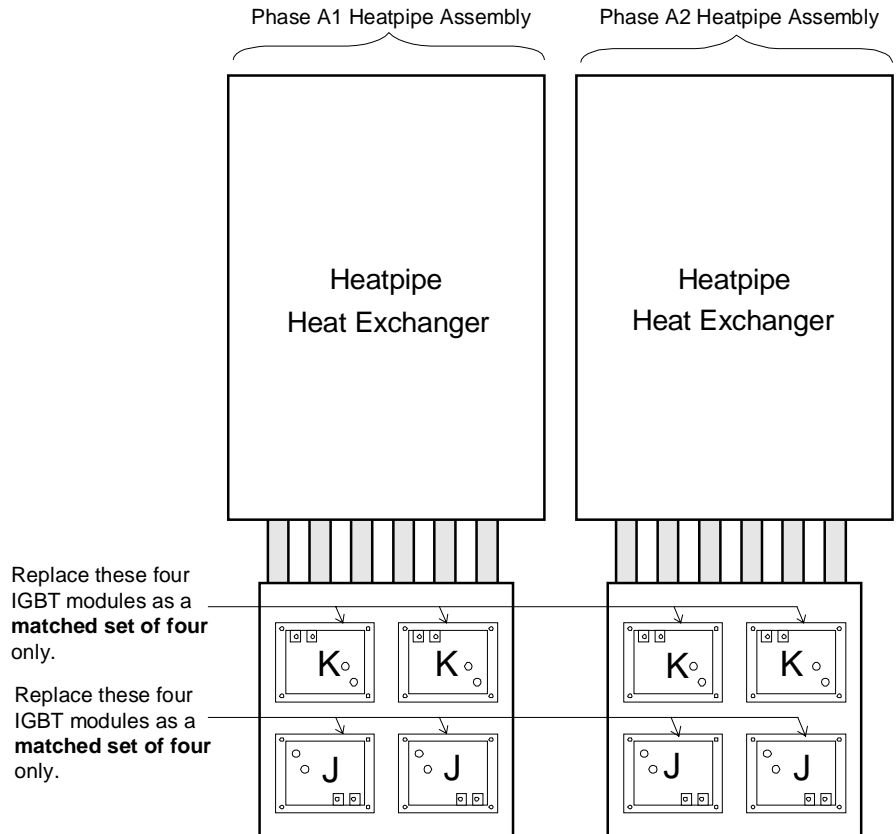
IGBT Module Location in 1800 Frame Heat Exchanger Assembly
